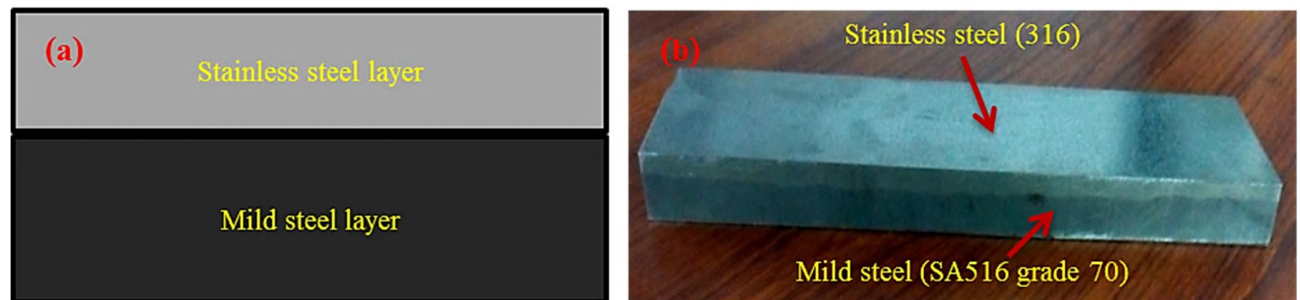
workpiece material; (a) 2D schematic front view, (b) 3D view
